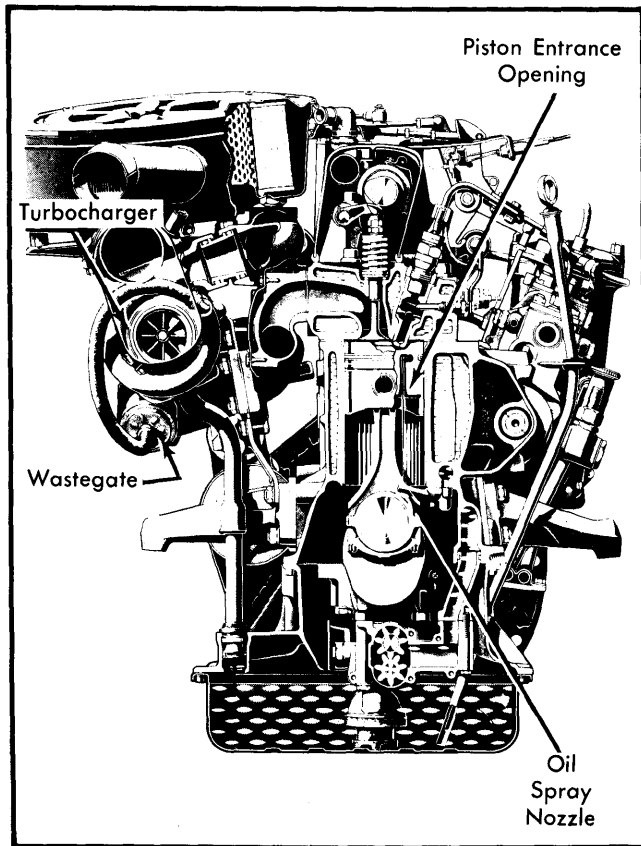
Cutaway View of Mercedes-Benz Turbocharged Diesel Engine
